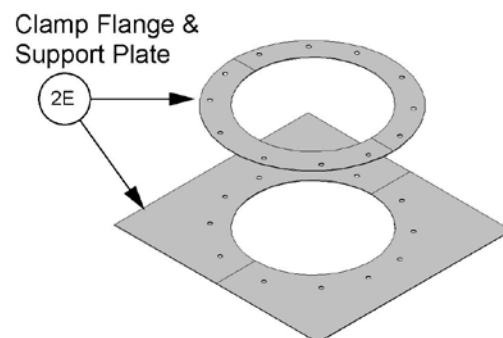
Plate Support Assembly - Support Plate and Clamp Flange
